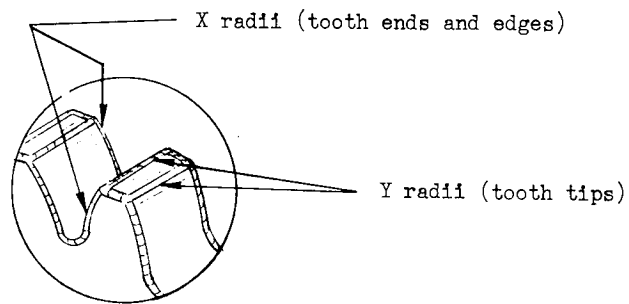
Sketch illustrating gear-tooth tip, edge, and end radii.
